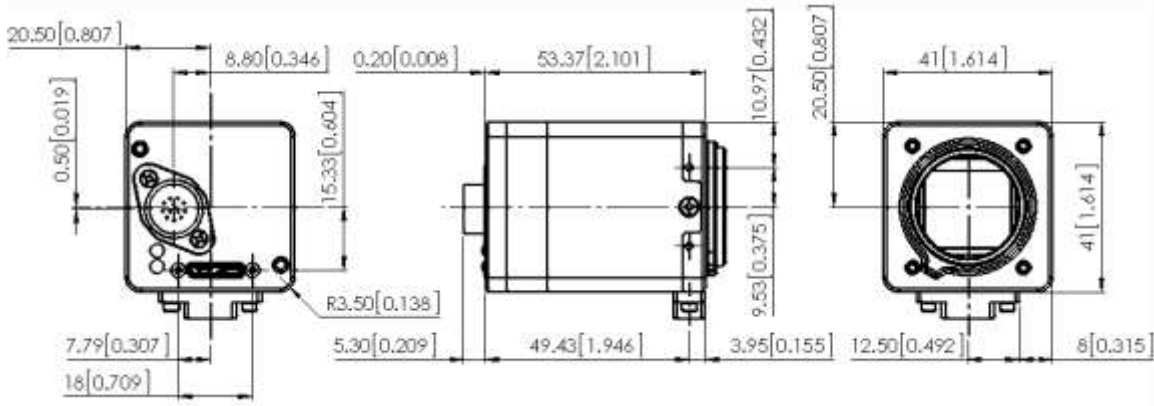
Basic Mechanical Dimensions of the NOCTURN U3 Camera (all dimensions are in mm [in])
